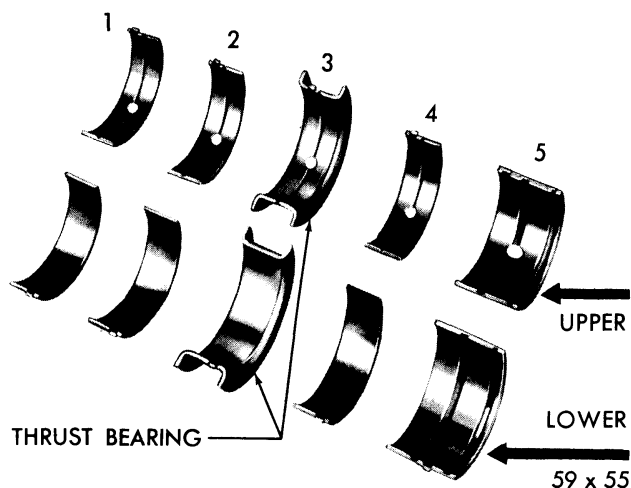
Upper and lower bearing inserts—Fury V-800 engine
